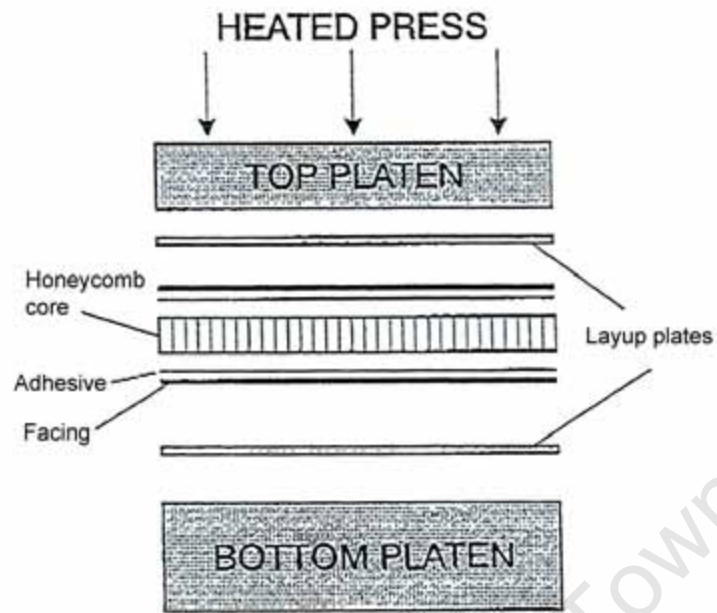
Diagram illustrating the manufacturing of a honeycomb sandwich panel using the heated press method [38]
